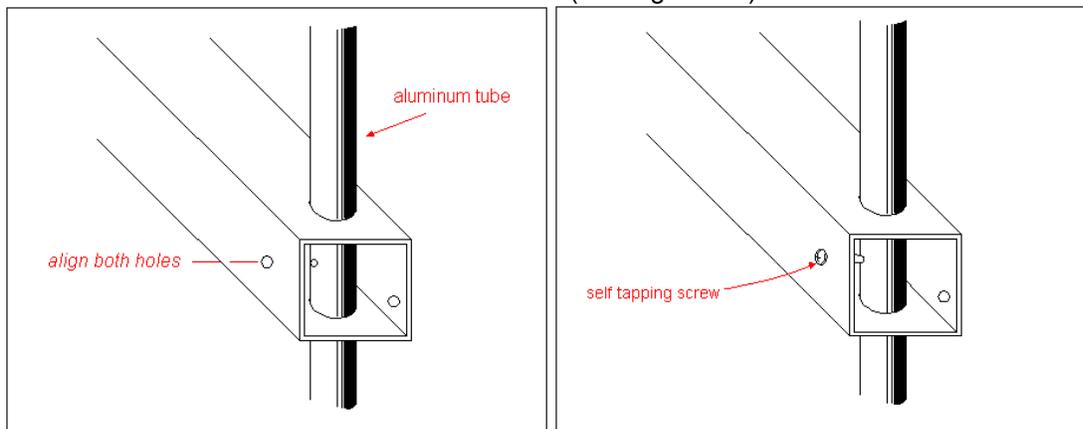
Inserting the aluminum tube into the mounting channel.
